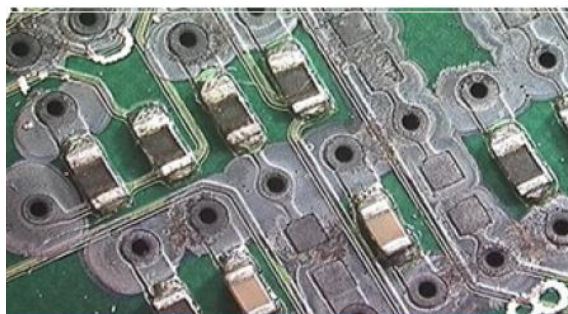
Creep corrosion on ImAg finished PCB
